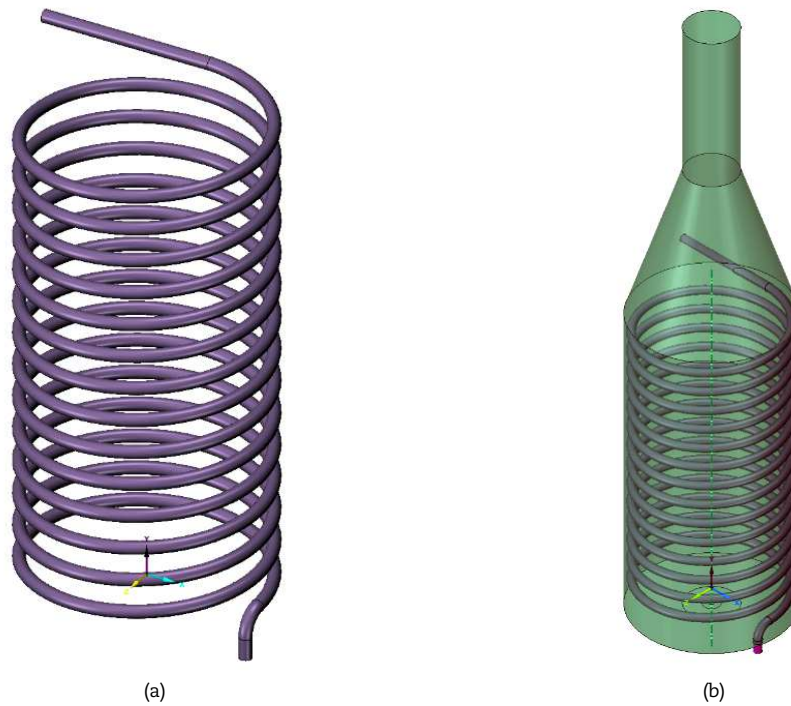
CAD model of the RPC's furnace, (a) Spiral coil, (b) Final geometry.
